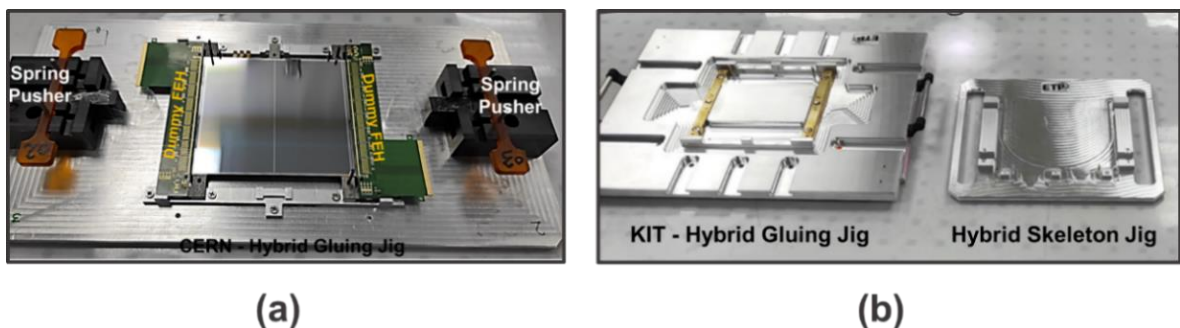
Hybrid Gluing Jig variants designed by (a) CERN and (b) KIT Assembly Center.
